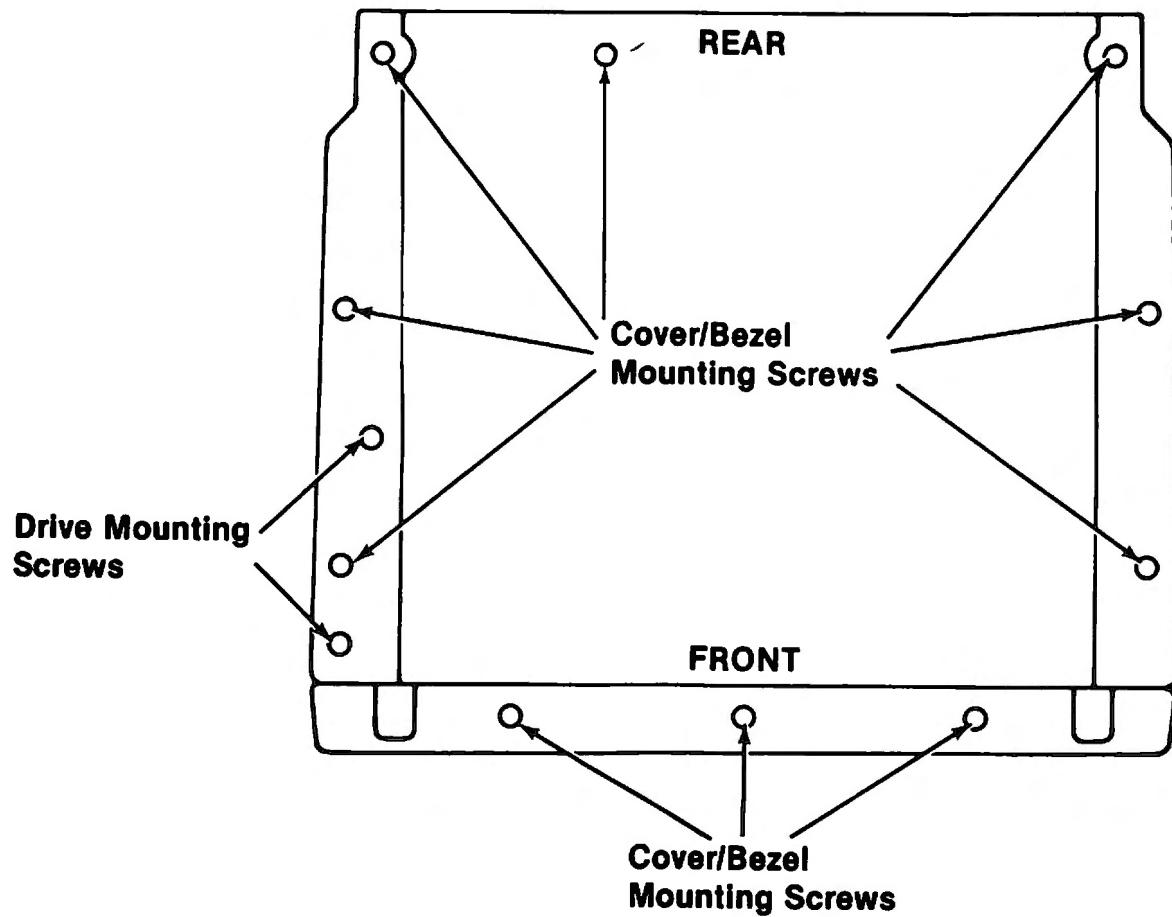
Cover/Bezel Assembly Mounting Screws
